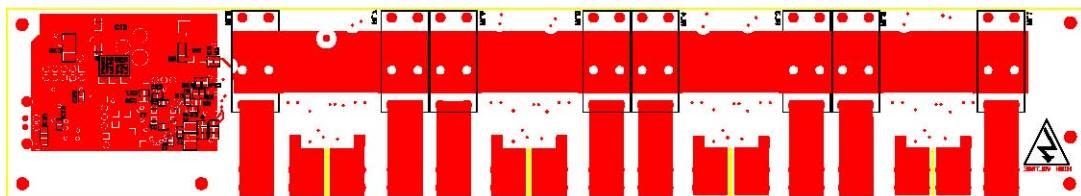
78M6618 PDU1 Evaluation Board PCB Bottom View
